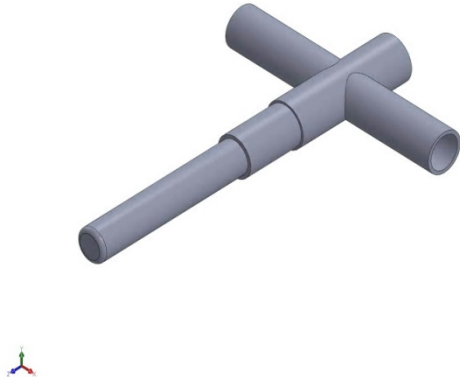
Fig 6 Cross Hollow Rotor Shaft
